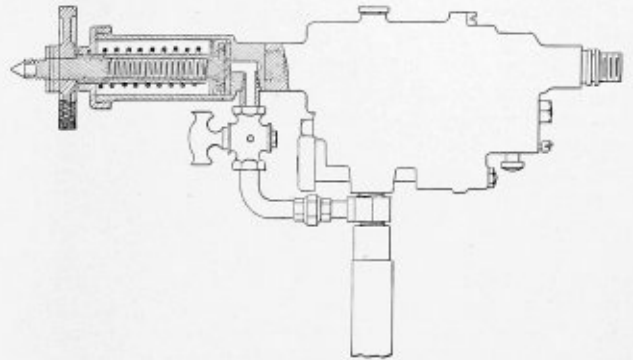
PNEUMATIC FEED ATTACHMENT FOR DRILLING TELLTALE HOLES
